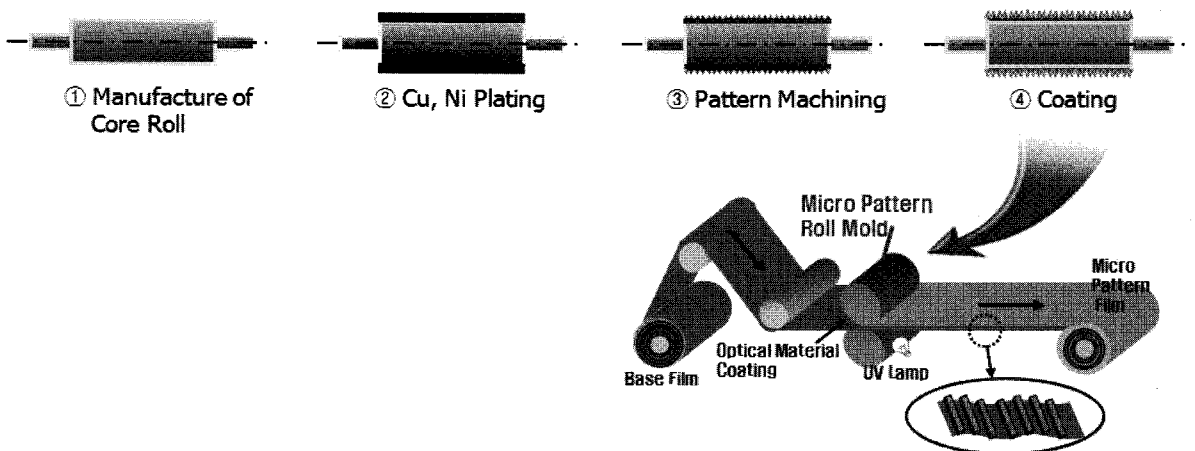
Manufacturing process of large surface roll molds and prism sheets
